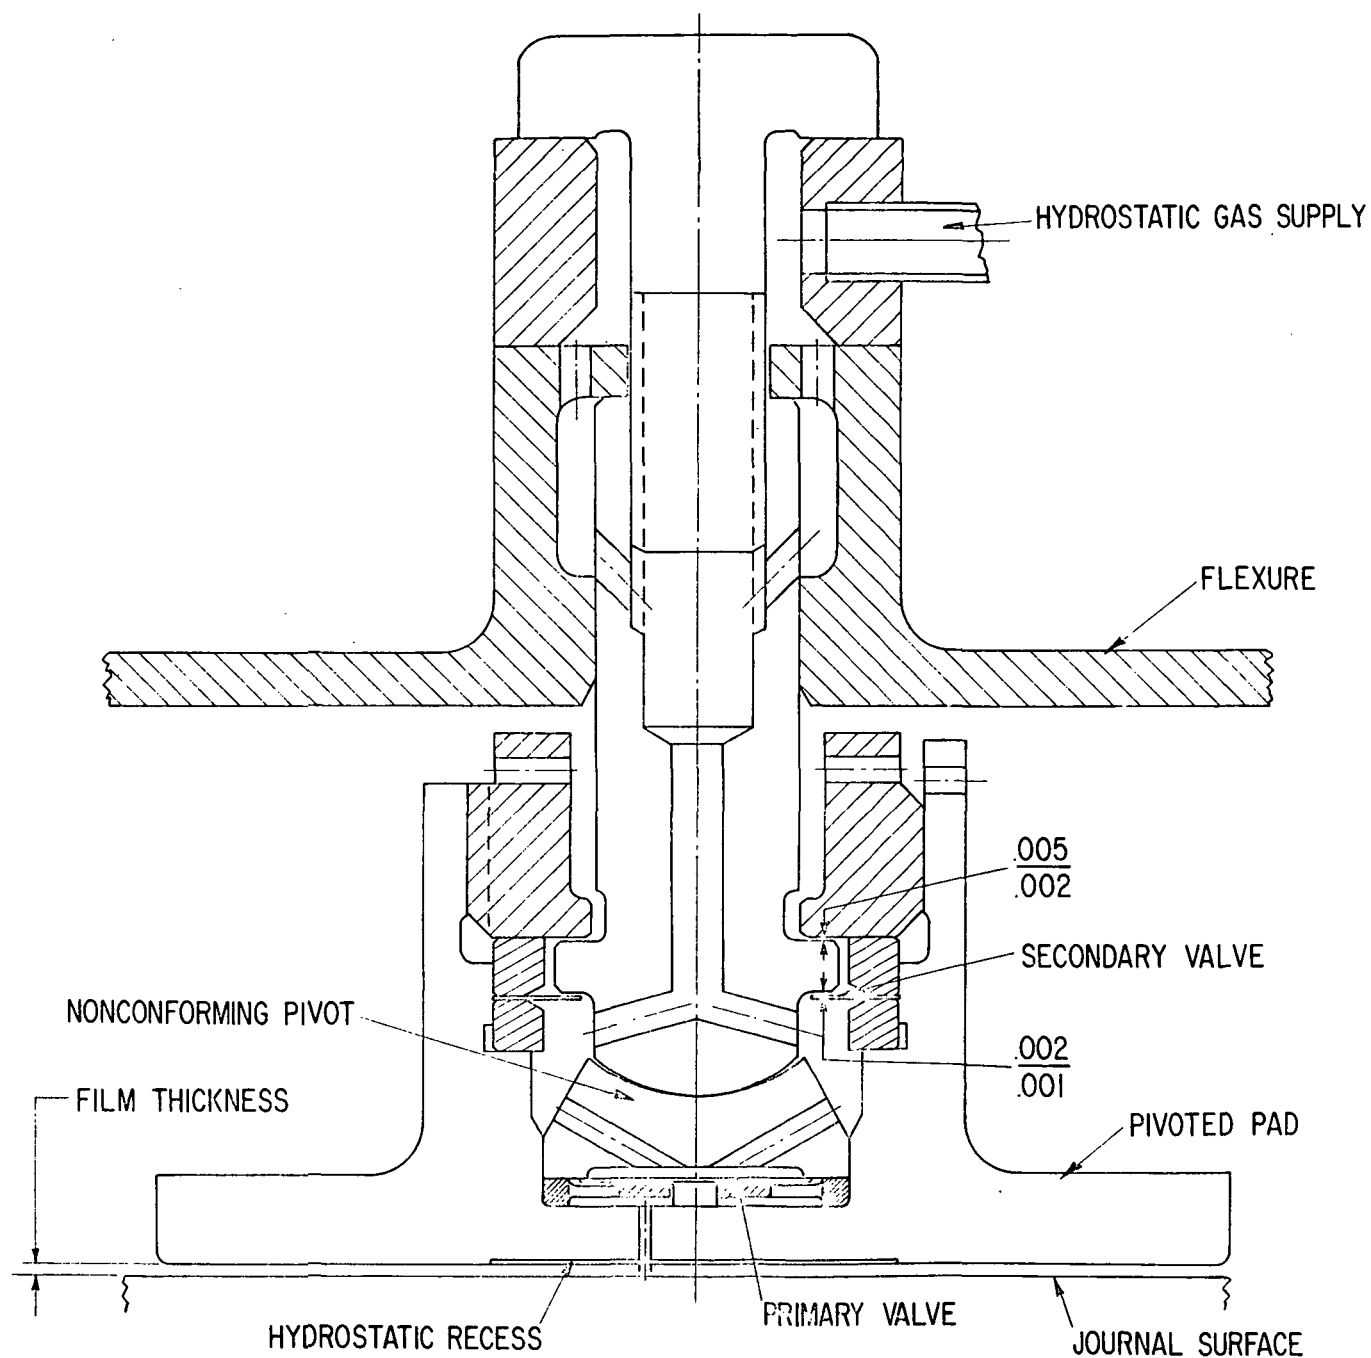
Cross Section of Nonconforming Pivoted Pad Bearing
